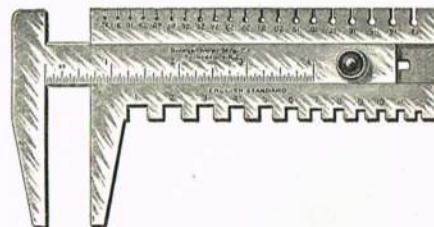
(No. 677.) Caliper and Wire Gauge.
